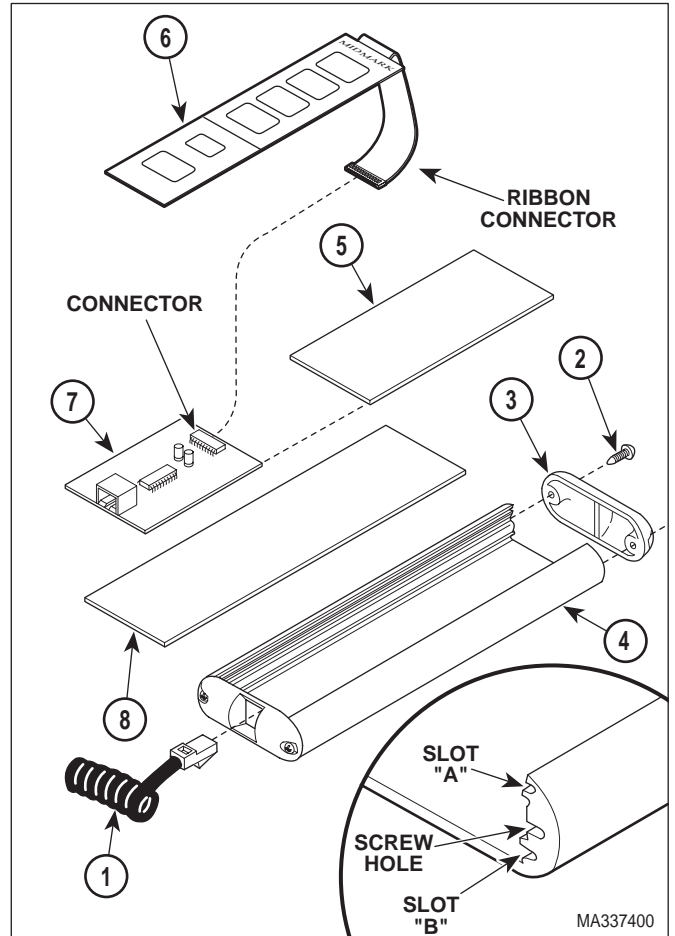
Hand Control Panel or Interface Board Removal / Installation (early)
